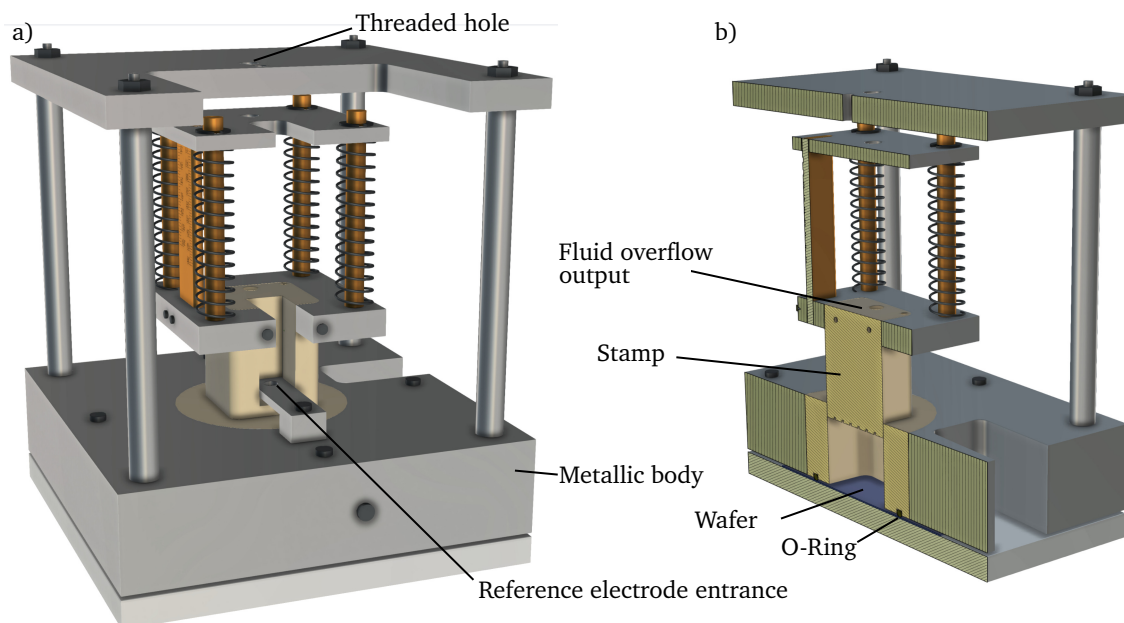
a) The mechanism of the spring system for fixing the membrane. b) Lower view of the stamp from CAD.
